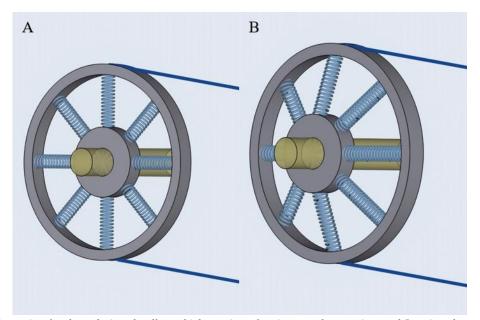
Concept illustration for the redesigned pulley, which consists of an inner and outer ring, and 8 springs between the two rings in the radial direction. The brown cylinder running through the inner ring of the pulley is the shaft of the rotary motor. A: All springs are of equal length and the motor shaft is in the center of the outer ring. No string extension in this instance. B: The springs are no longer of equal length, where the outer ring is skewed towards the direction of the string ends to facilitate the string extension. The displacement from the outer ring in A to the outer ring in B is equal to the length of string extended on one side of the probe holder, since the displacement will allow the strings to extend on both ends of the string loop.
